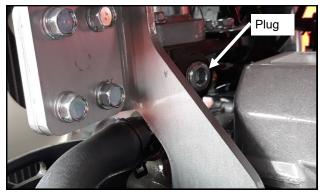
B (Remove Plug from Engine) CK3510, CK4010
